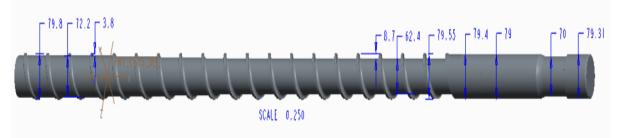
Drawing of Reciprocating Screw of Diameter 79.8 mm
